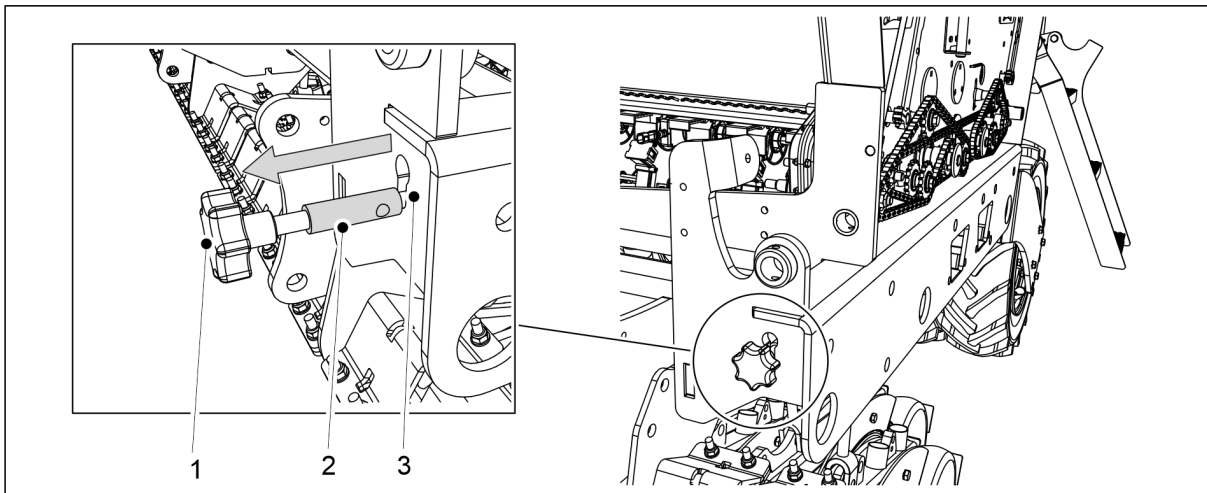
162. Pulling out the calibration test adjuster rod
